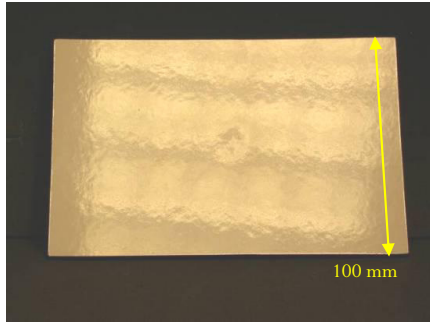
30 J, 70 mm flat cylinder impact on 17 ply unpainted laminate again produced two surface flaw areas with deeper, but less complete circular shaped depressions
